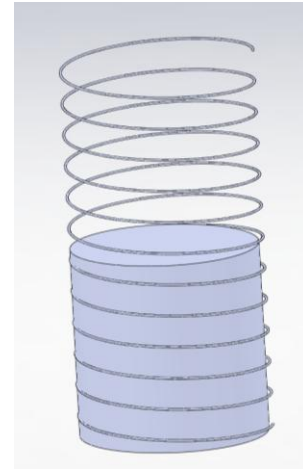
SolidWorks drawing of Active Clip with Magnet
